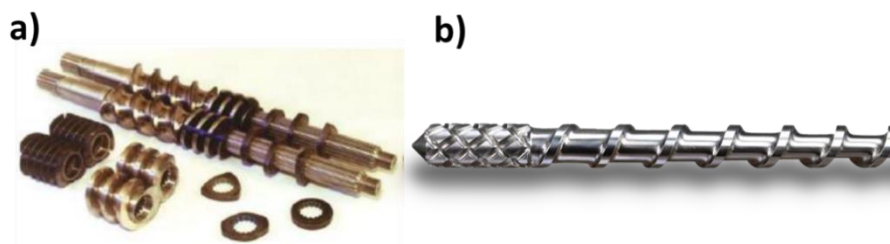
a) Interlocking screws of a twin-screw extruder [69]; b) Screw of a modular single-screw extruder (3Devo® Composer series) [70].
